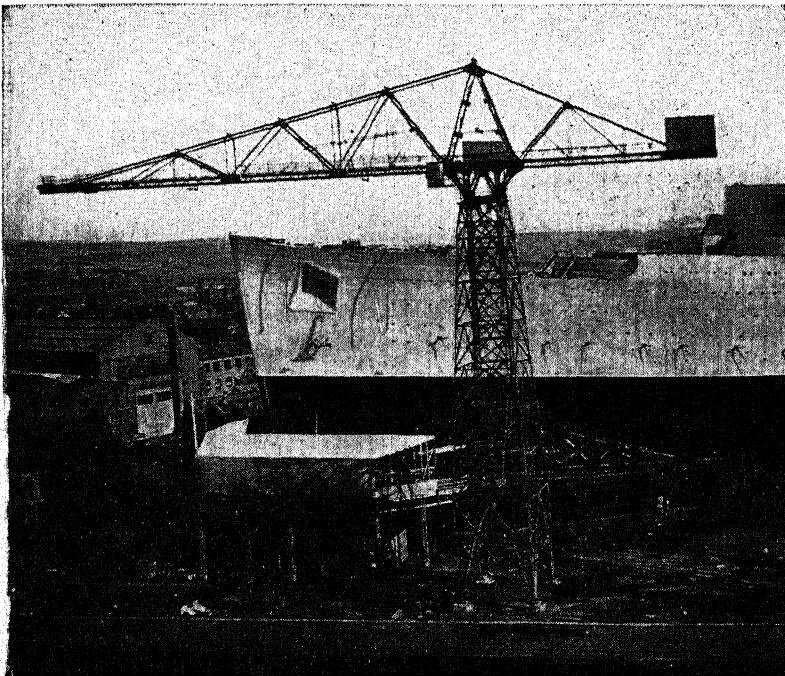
Type of tower crane, production of which led to fabrication of the arc welded rotary planing machine.
